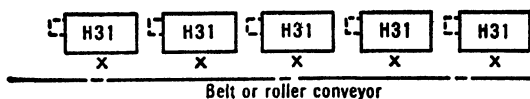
Machines Laid Out Parallel to a Belt or Roller Conveyor. Material is moved to and from the machines by conveyor and no trucking aisle is needed. Operator turns through 180° to use the conveyor.
